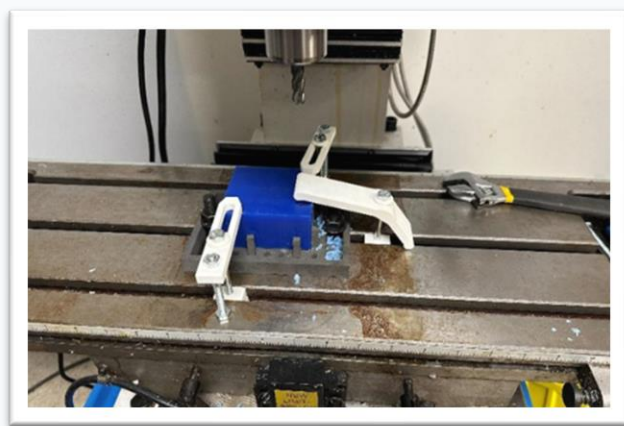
A 3D printed fixture – a combination of SLS (gray) and MEM (FDM/FFF) (white) parts
